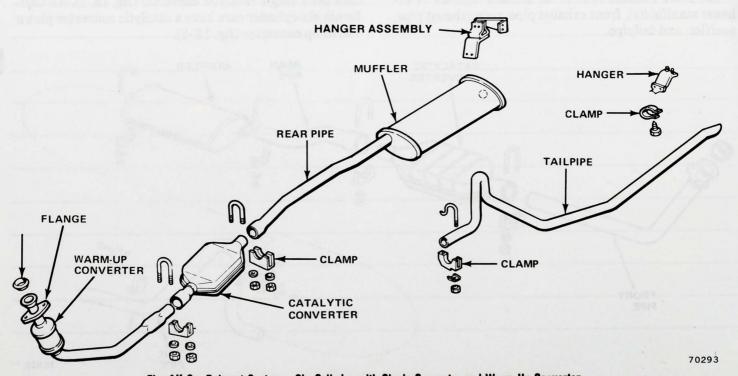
K-3 Exhaust System—Six-Cylinder with Single Converter and Warm-Up Converter
